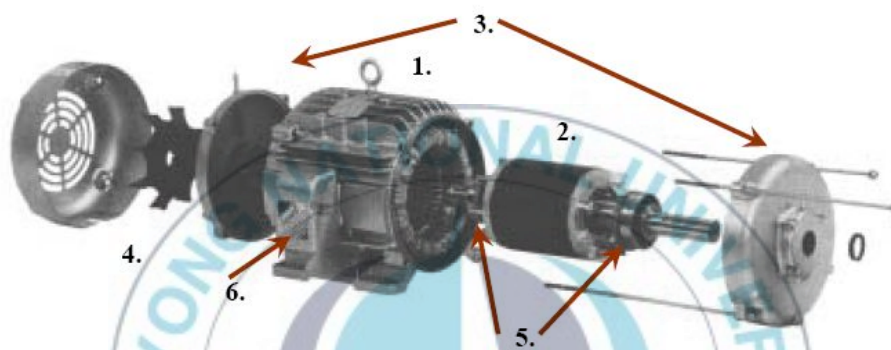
Exploded view of cage motor: Stator (1), Rotor (2) End-caps (3), Cooling fan (4), Ball bearings (5), Terminal box (6) [4].
